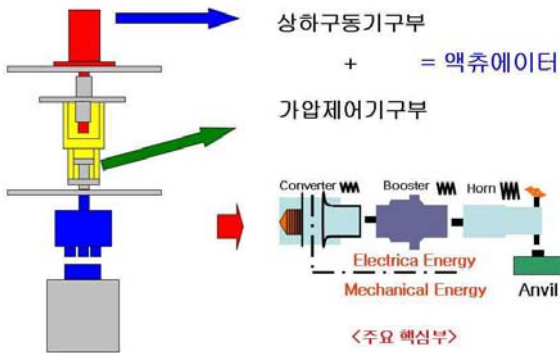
Structure of ultrasonic metal welding machine
